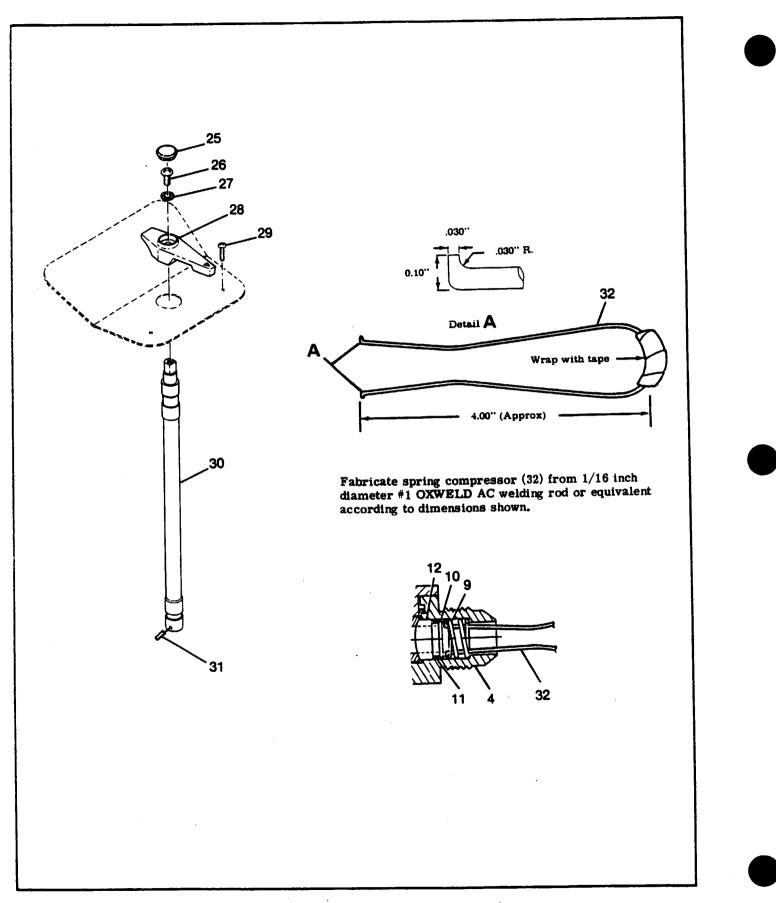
Fuel Selector Valve (Sheet 2 of 2)
